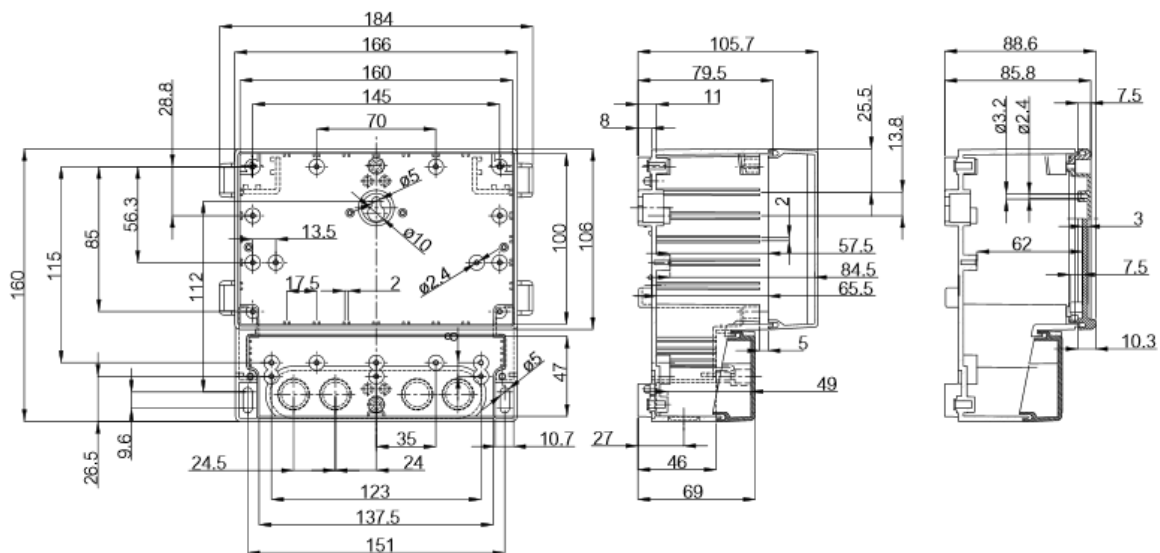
A Multiview Schematic Drawing of FIBOX Enclosure [15]. *Consent to reproduce figure requested.
